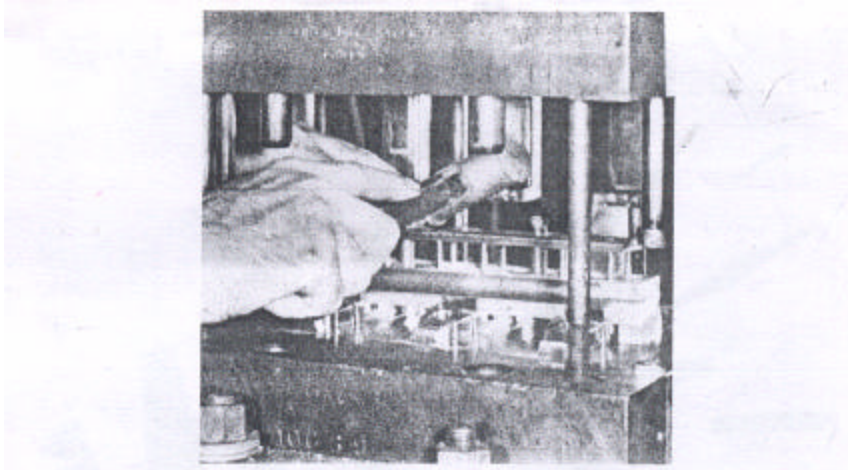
This insert loader holds four inserts for each of the three cavities. They are released by withdrawal of the slide and are then tapped firmly into position on the mold insert holding pins.
